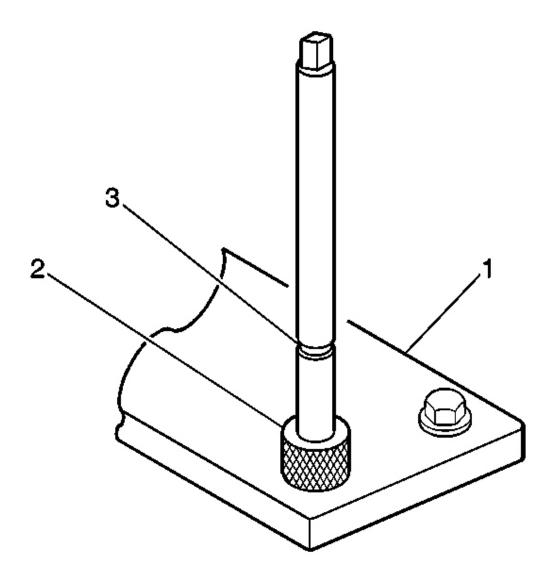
View Of Fixture Plate, Drill Bushing & Tool Marking Courtesy of GENERAL MOTORS CORP.
